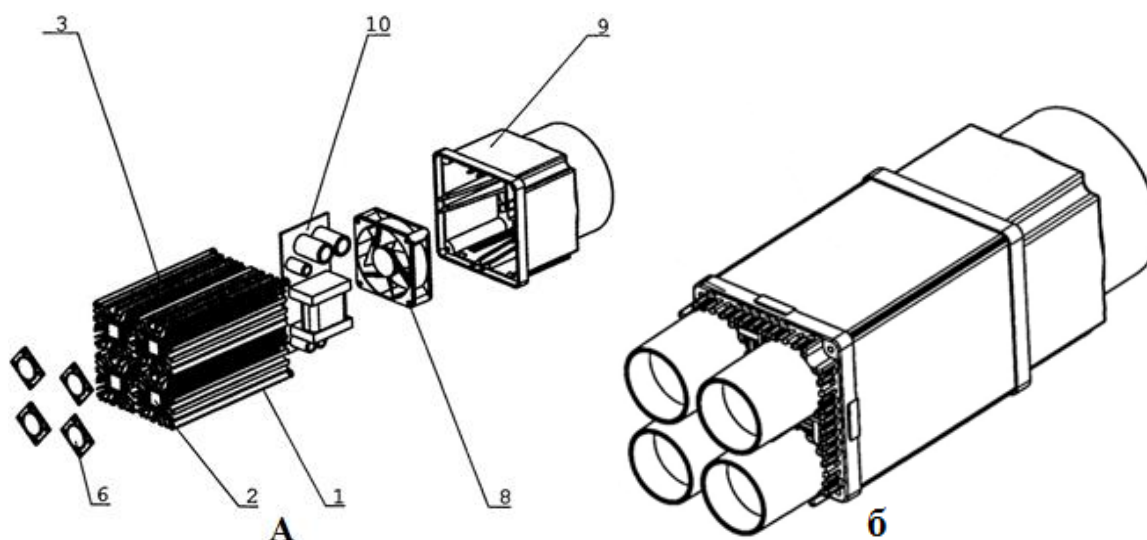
a) Assembly parts; b) Appearance of LED searchlight patent [5]
